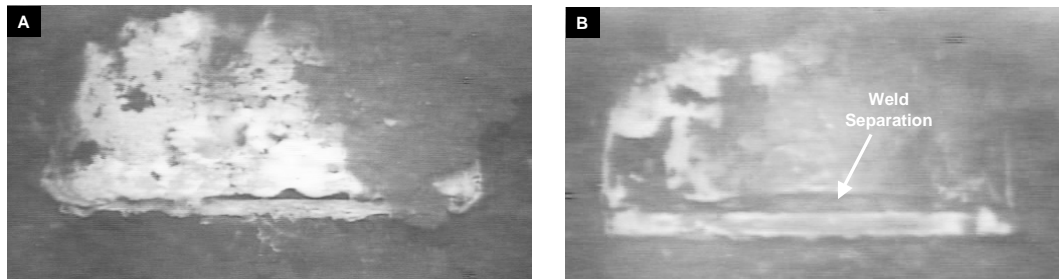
Primary (A) and backup film coolers (B). Weld separation on the lower lip of backup film cooler is evident.
